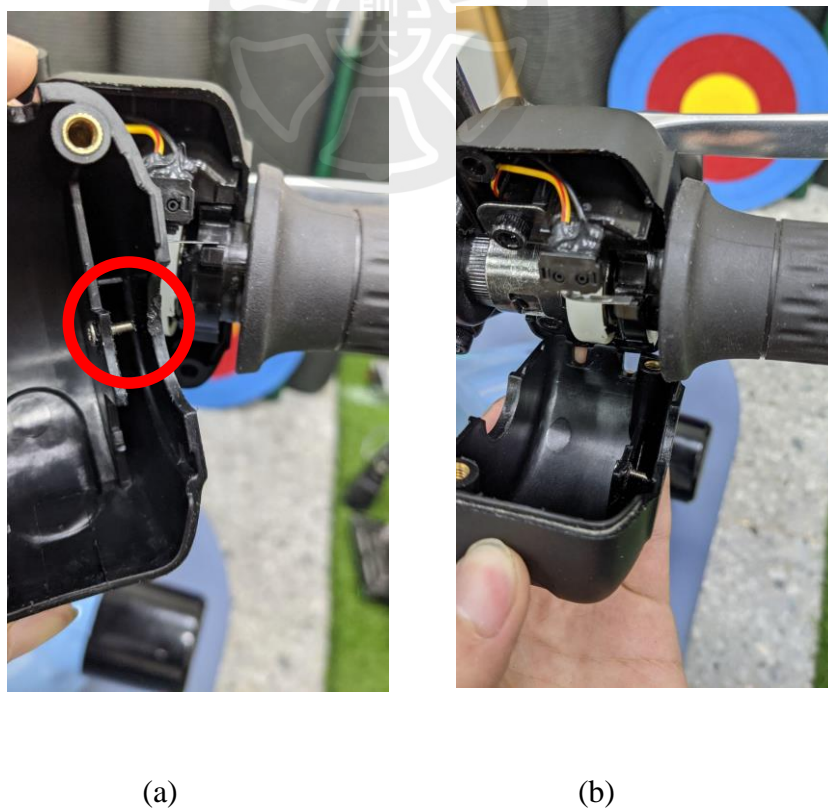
(a) Applied a screw in throttle system. (b) After applied the screw, closed the case then the throttle angle will be exhibited.
